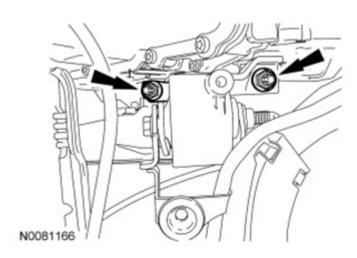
Locating Upper Insulator Nuts Courtesy of FORD MOTOR CO.
